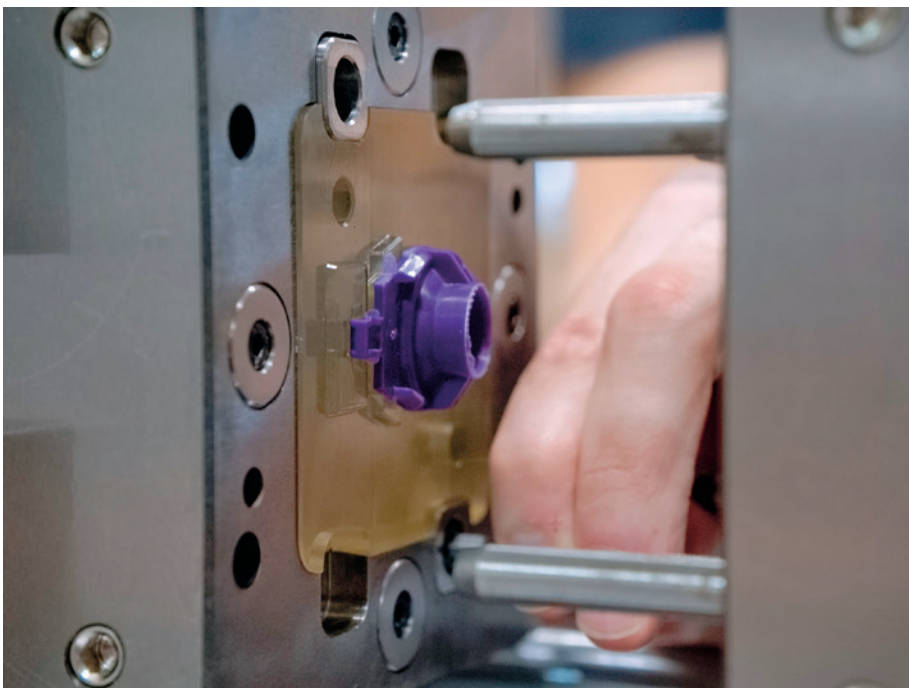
Lilac moulded part in a cavity printed with high temperature resin.
